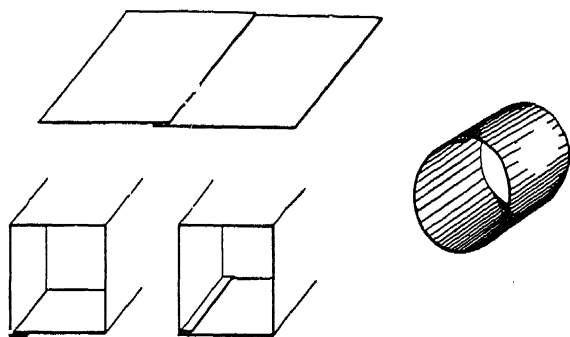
Typical lap seams and uses. All lap seams must be soldered or riveted for fastening
